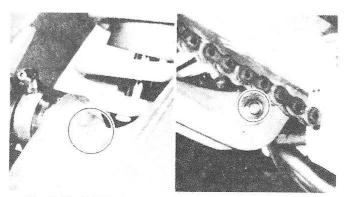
YTZ 250 upper connecting rod bolt (left) and lower shock mount bolt (right) locations (Sec 7)
